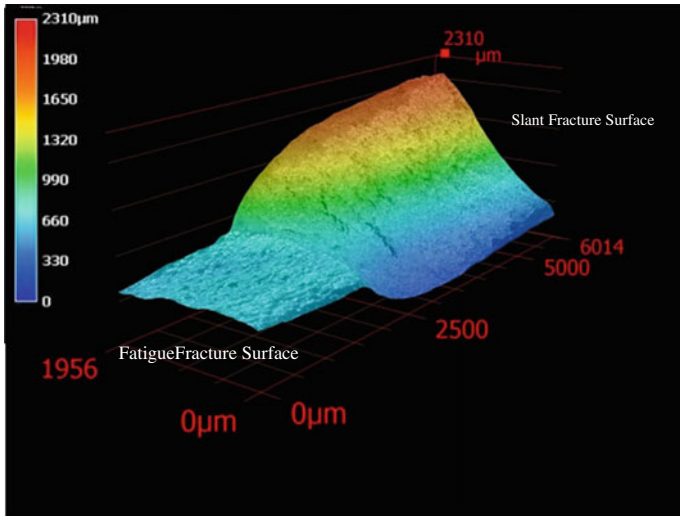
Illustration of fracture in Al 6061-T6 indicating the initial fatigue fracture surface (flat) and the subsequent slant fracture under monotonic loading. A transition region can be seen near the initiation point, connecting the flat fatigue precrack and the slant growth under monotonic loading. The *color map* indicates height from the fatigue fracture plane. The height map was obtained using a Keyence microscope
